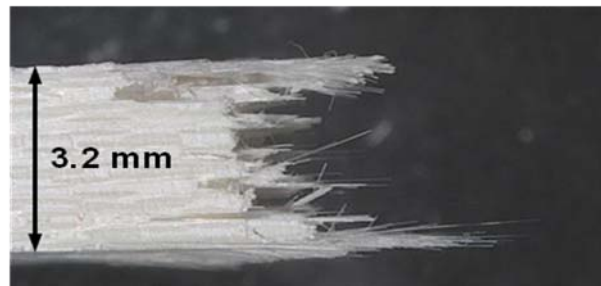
Fracture surface of the N720/AM specimen(2) tested in tension to failure with constant loading rate of 0.0025MPa at 1100°C in steam (side view).
